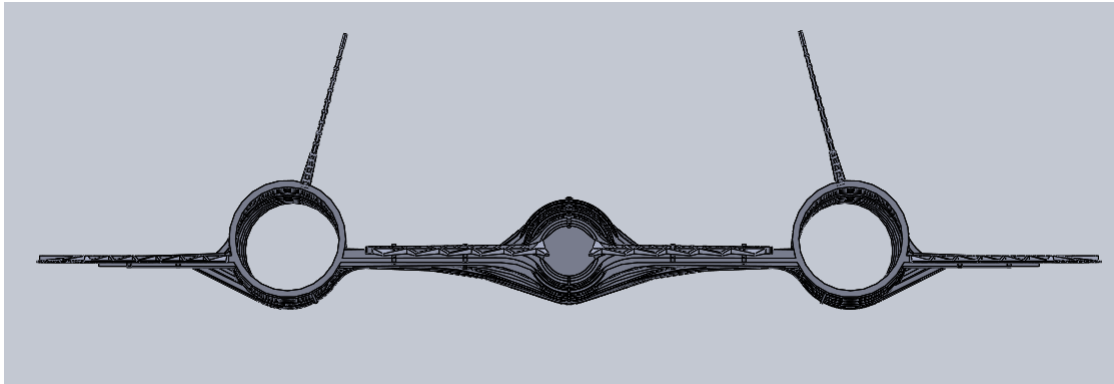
Full 3D CAD structure of the Lockheed SR-71 (back)
